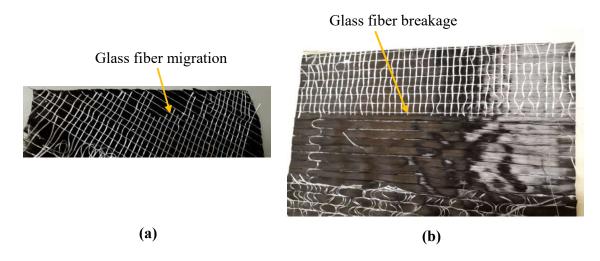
Clamped region of UD-NCF test specimens: (a) Fiber glass migration caused by low clamping force, and (b) fiber glass breakage caused by high clamping forces and sharp bends in the fixture.
